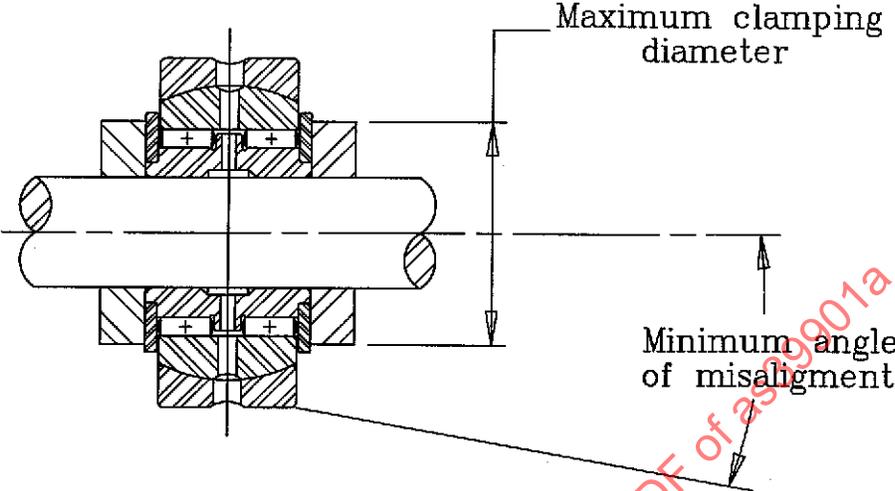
E - Self-aligning Test for Type III and IV Bearings
